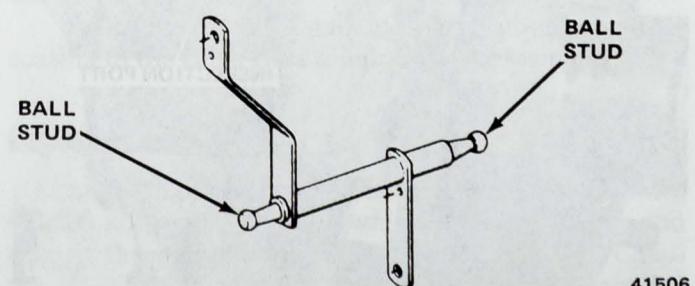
Six-Cylinder Clutch Bellcrank Pivot Ball Studs
